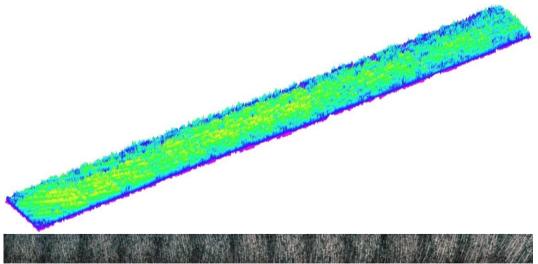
The 2D and 3D images of the surfaces machined with the carbide milling cutter (the eighth mode).
